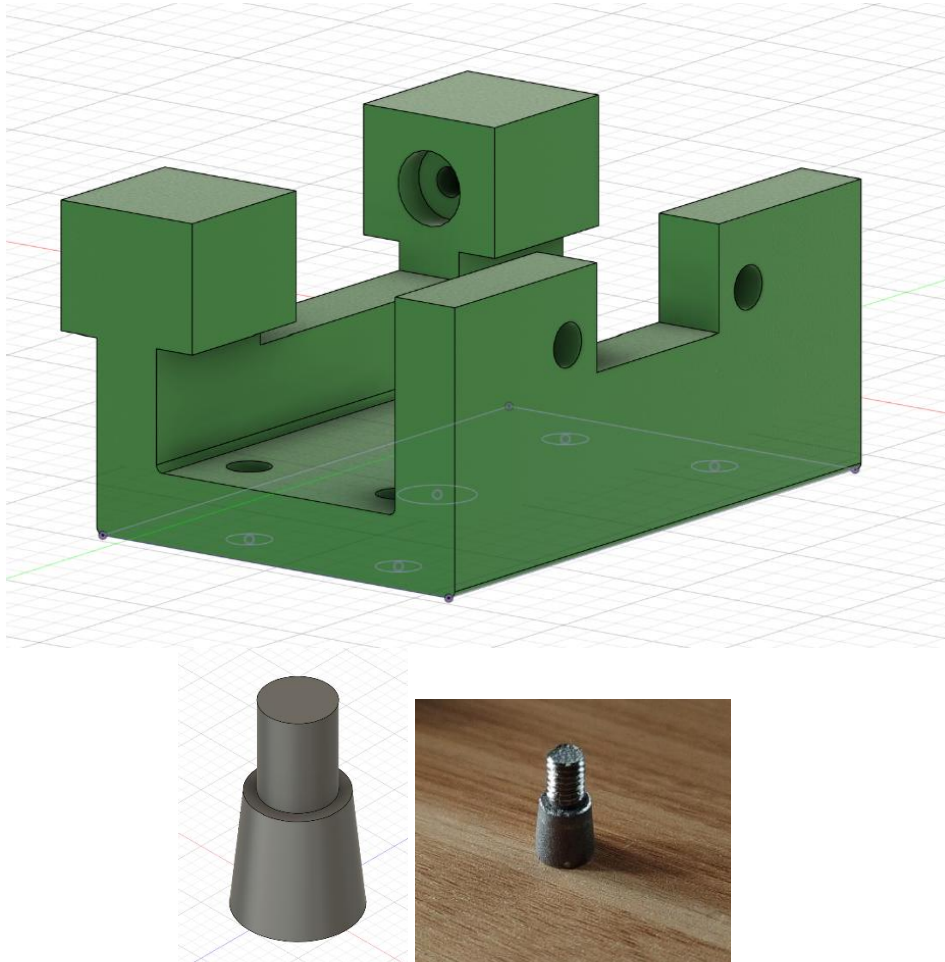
3D Printing PLA+ Sheel and Stainless Steel Connector
